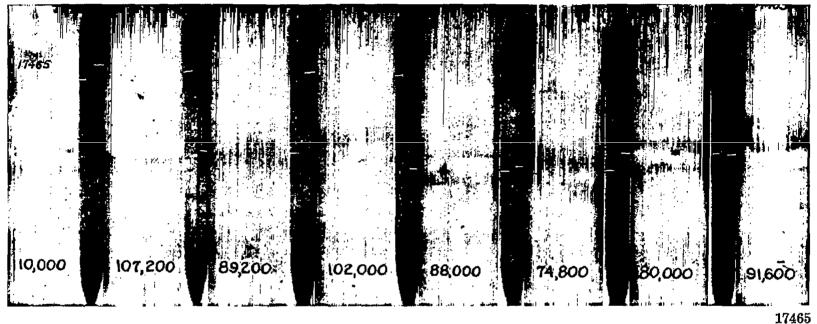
Radiograph of metal-arc-welded static tension specimens in 1/2-inch SAE 4130 sheet.
